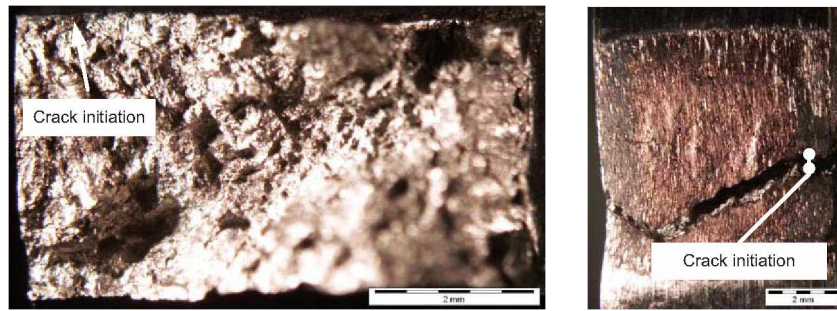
Fracture and fretting damaged surface of a beta-annealed specimen at 300 MPa
